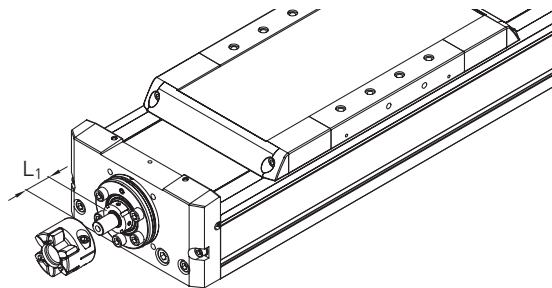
Attaching the clamping hub to the linear table HT-S drive journal
